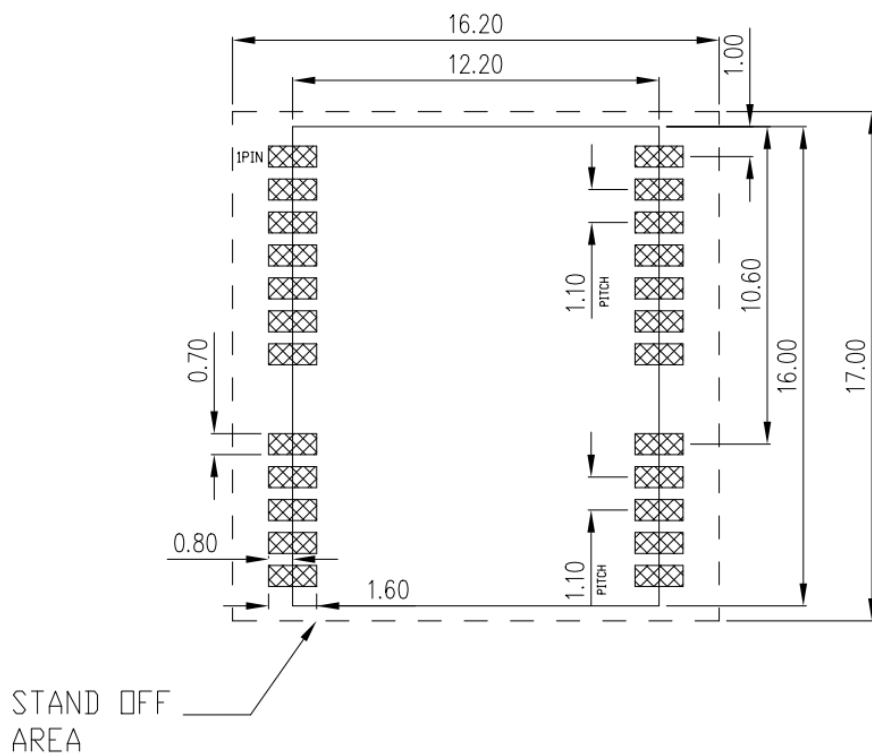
Recommended PCB footprint (top view) (Unit: mm)
